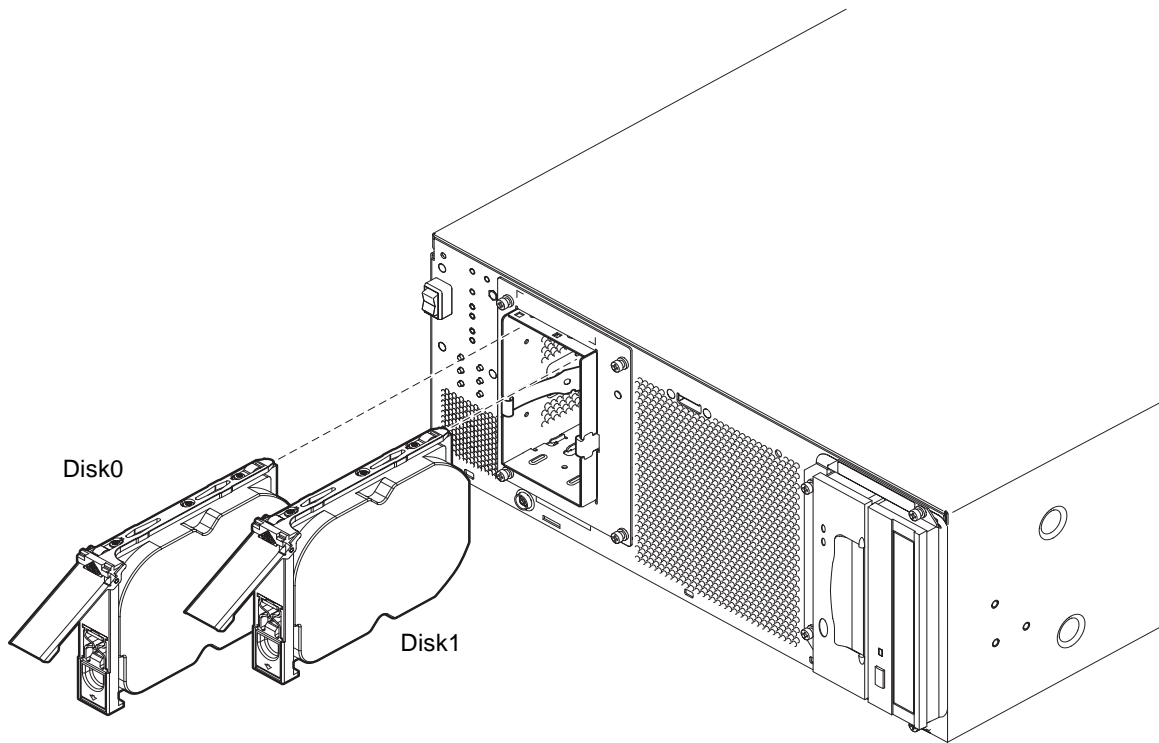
FC-AL Disk Drive and Drive Bay Assembly
